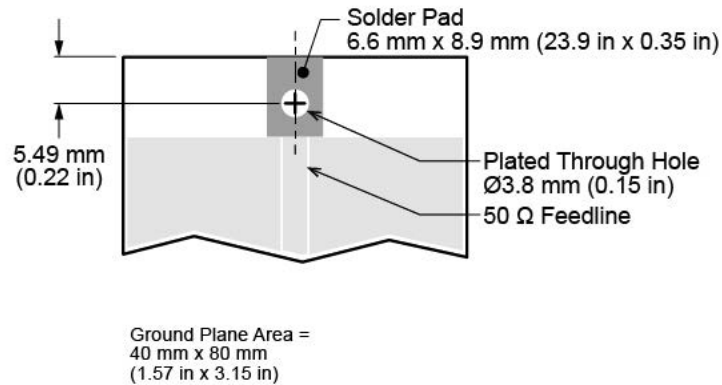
ANT-8/9-PW-LPN Recommended Mounting and PCB Footprint
